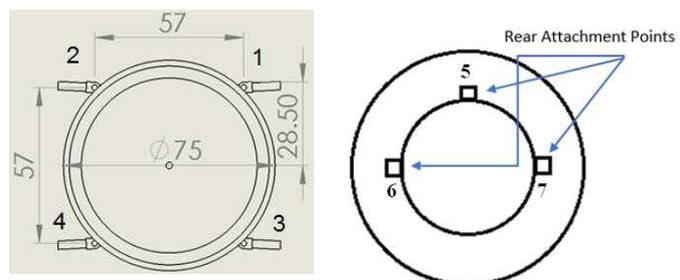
(a): Front view of Turbofan engine showing four attachment points; (b): Rear view of the Turbofan engine showing three rear attachment points
